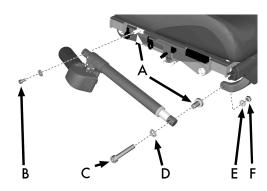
REAC leg rest actuator is held in place by two screw joints, (B) and (C).
